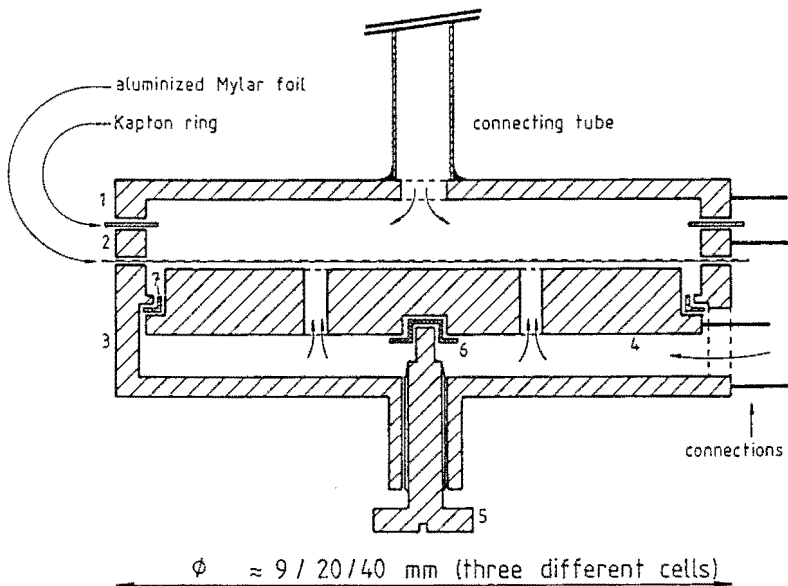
Stainless steel pressure transducer. 1, 2, 3 Housing; 4 Fixed capacitor plate; 5 Set screw; 6 Insulating Celoron* button; 7 Insulating Araldite* ring. All parts are glued together with Stycast 1266*. Part 4 is insulated from the housing 3 by the ring 7 and spacer 6. Part 2 is insulated from part 1 and 3 by a Kapton ring and the Mylar foil and is used for electrical connection. Parts 1 and 3 are connected forming the electrical mass, which has a function as electrical shielding. The set-screw is adjusted finger tight. Pressure communication occurs through the holes as indicated by the arrows.
